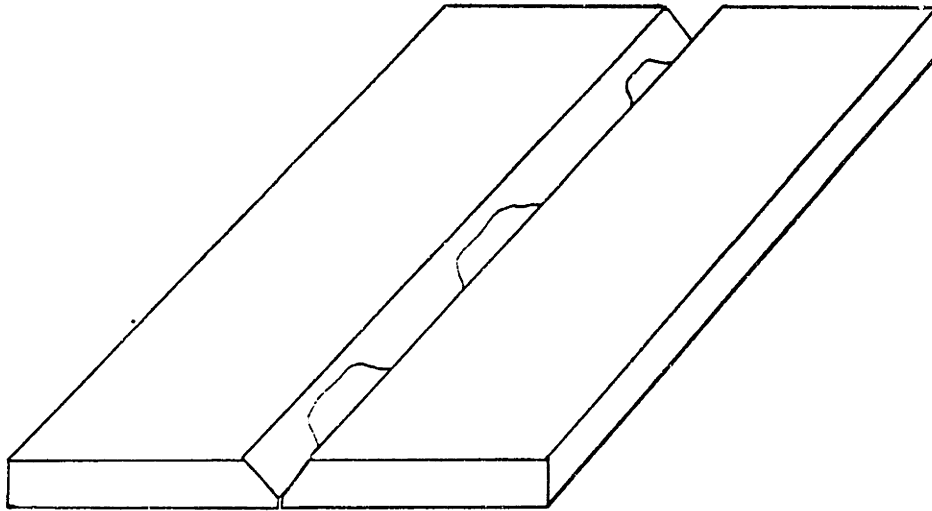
Tack welded butt joint used in experiments.
